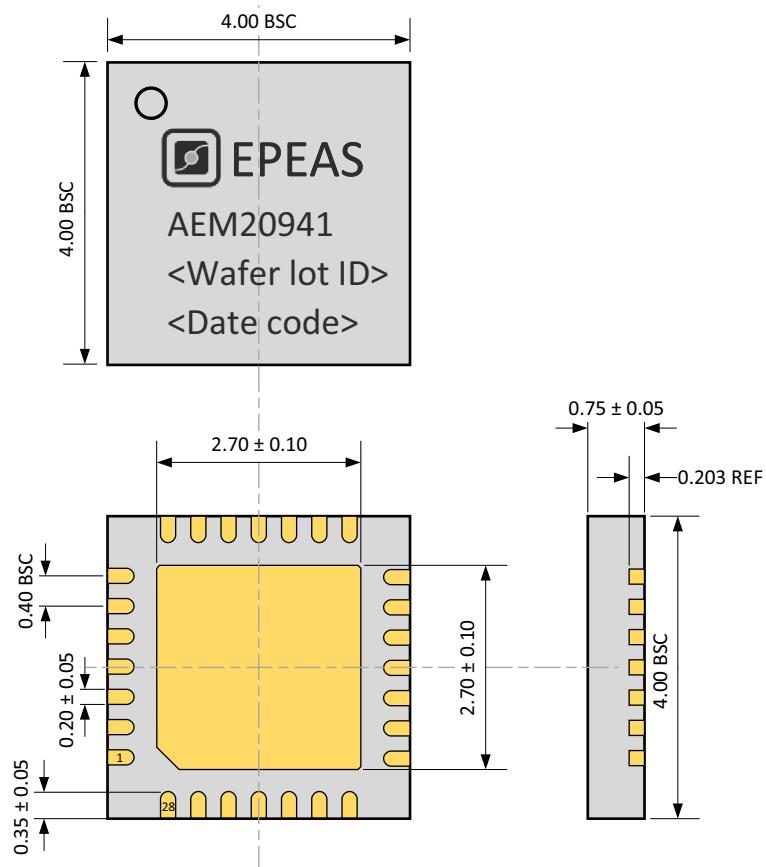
QFN 28-pin 4 x 4 mm drawing (all dimension in mm)
